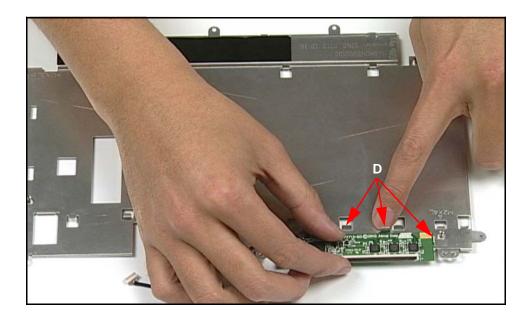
Aligning Control Board to LCD Support Plate Guides
